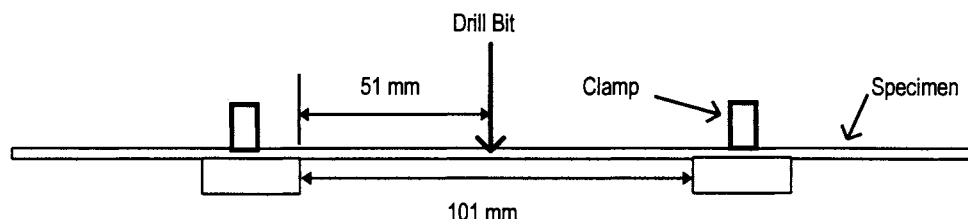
Drilling fixture. (Scale 1 mm = 2 mm)
